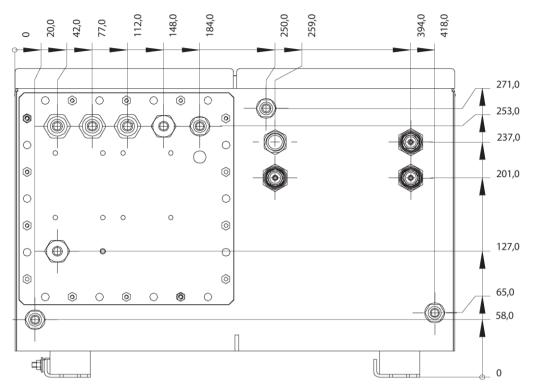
ULTRAMAT 6F and OXYMAT 6F, dimension drawing: Bottom view
